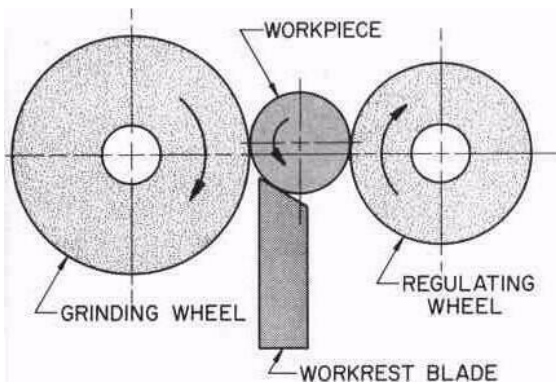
Relationship of grinding wheel and work-piece in cylindrical centerless grinding.
